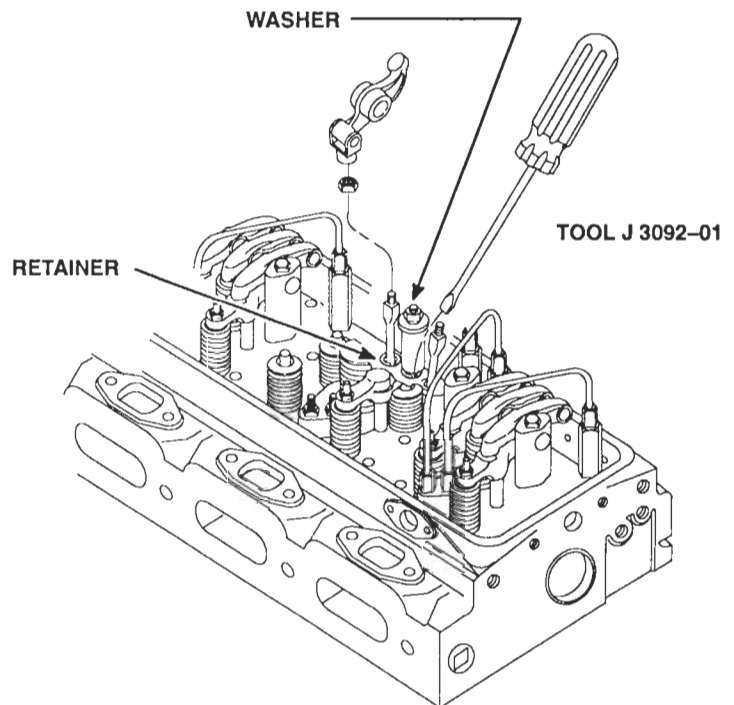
Removing Push Rod from Upper Side of Cylinder Head
